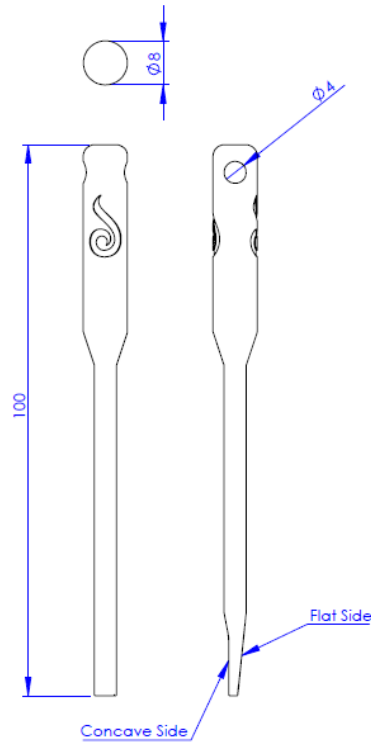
Diagram and dimensions of the Dr. Dabber Pro Loading Tool. All dimensions are in mm.
